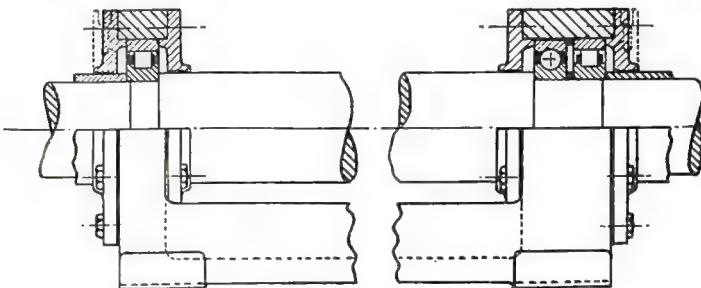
Ball and Roller Bearings to Fan Shaft.
